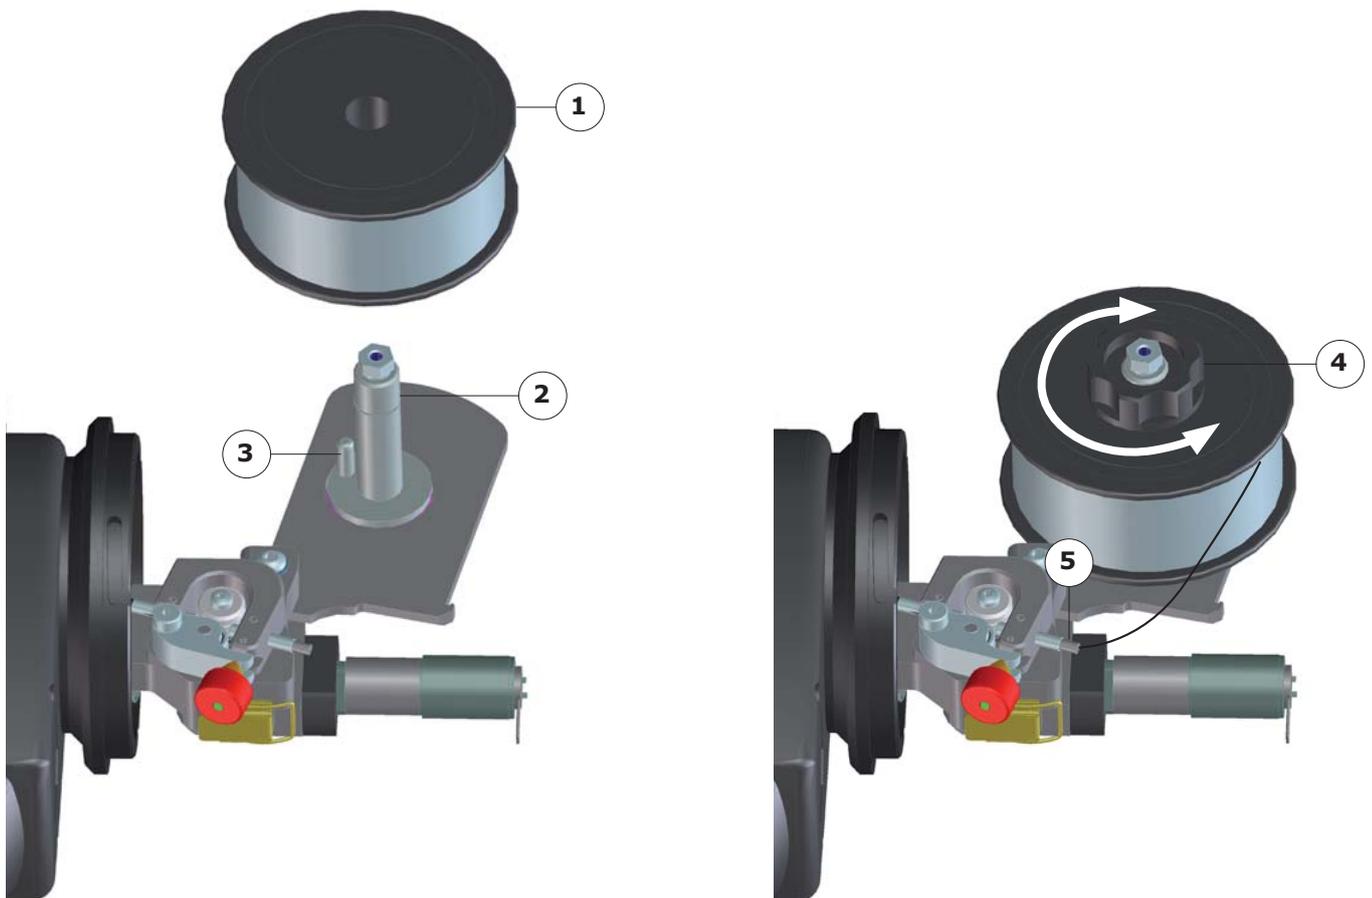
Inserting a wire spool on the rotating wire feeder
